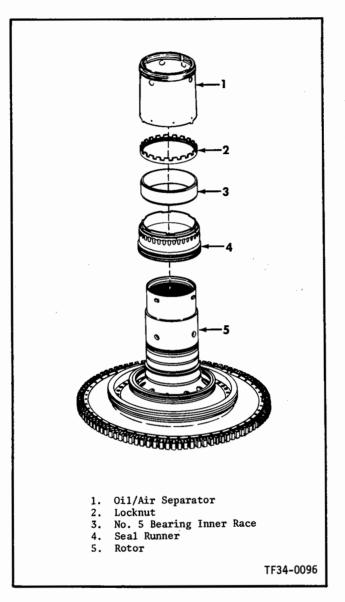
Assembly of High-Pressure Turbine Rotor
